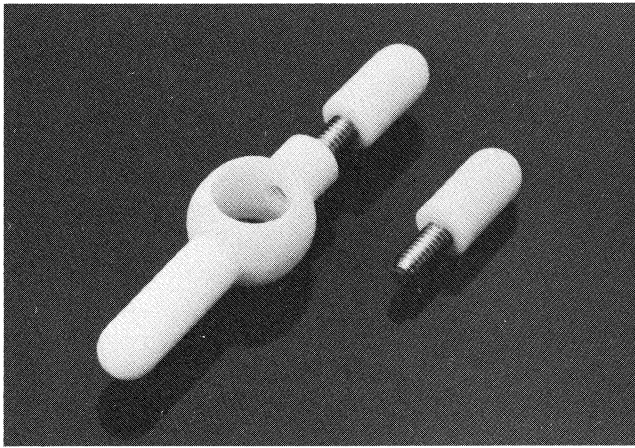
These parts are produced in white urethane. One part has an intercast threaded stud and the other has a cast 6-32 threaded hole.
